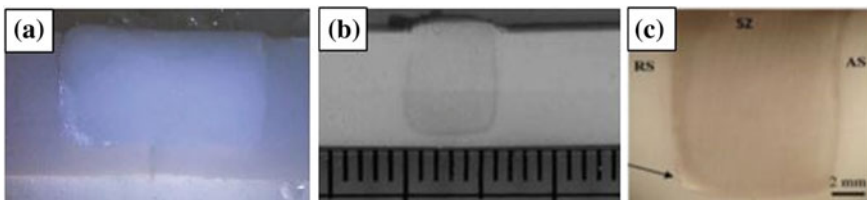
Cross sections of friction stir welded nylon-6 specimens a 5 mm thick [11] b 10 mm thick [7] c 16 mm thick [25]
